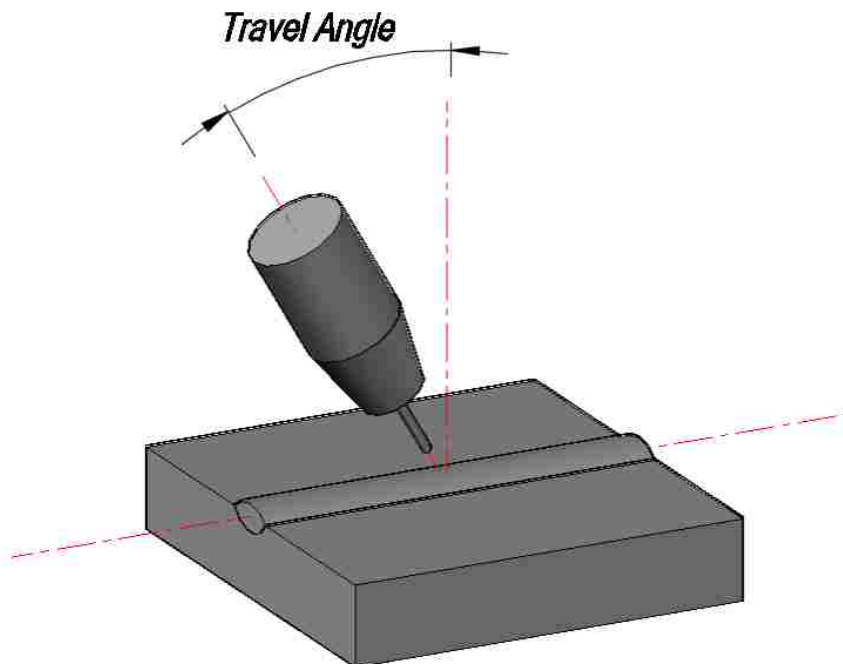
Welding travel angle (reproduced from Linnert 1994)
